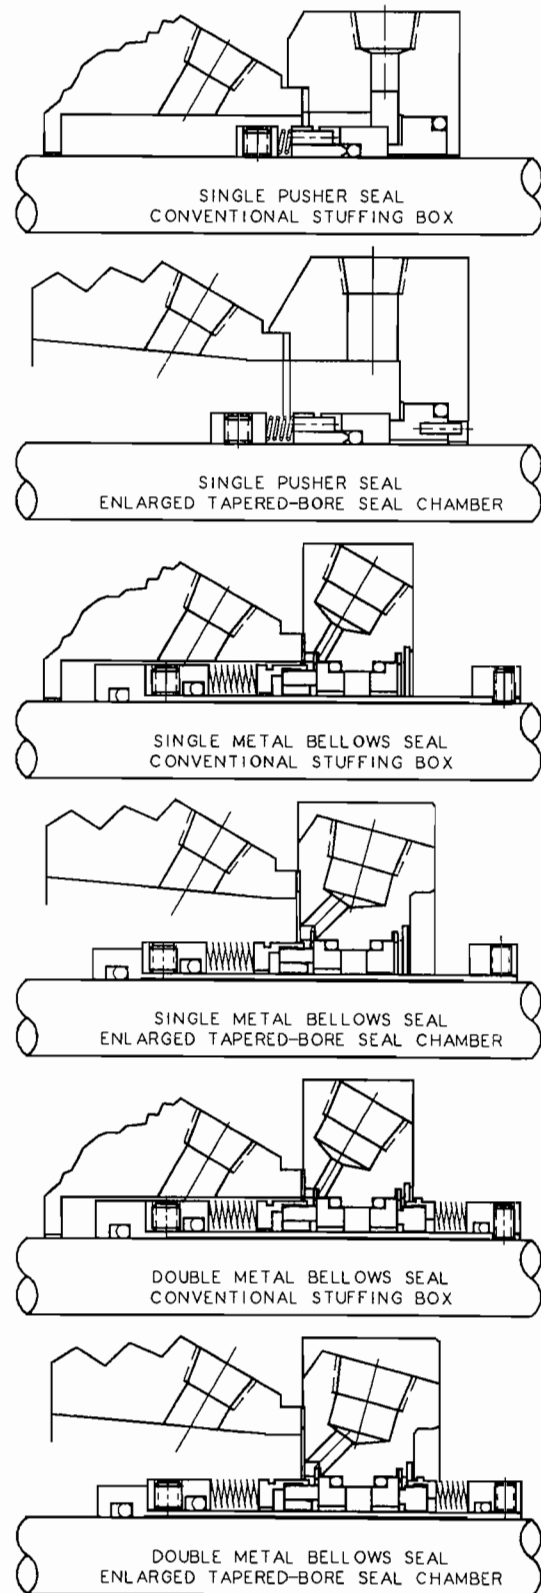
Mechanical Seal and Seal Chamber Arrangements.
